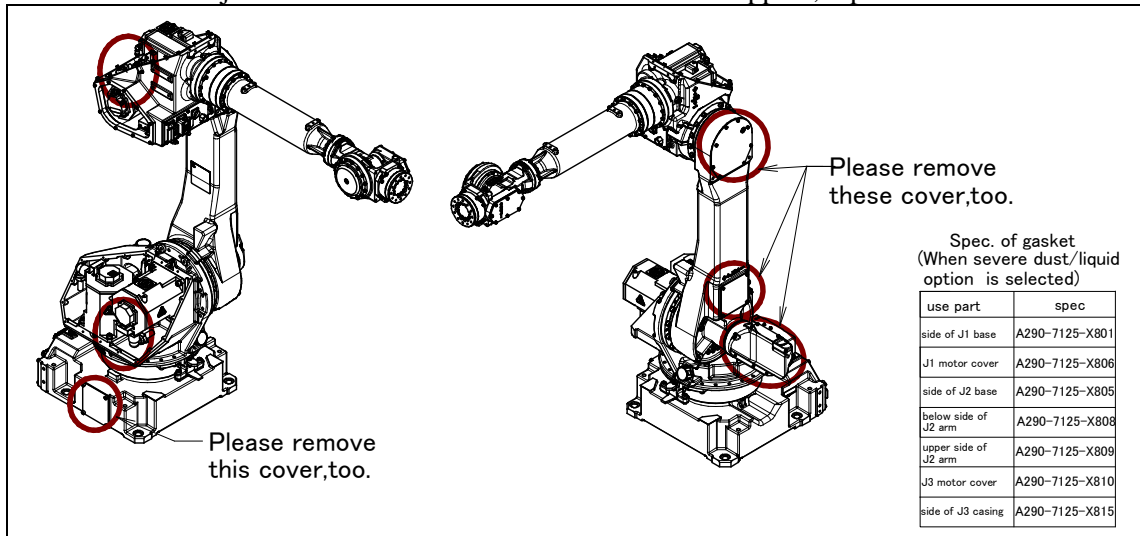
(a) Inspection points of the mechanical unit cables
